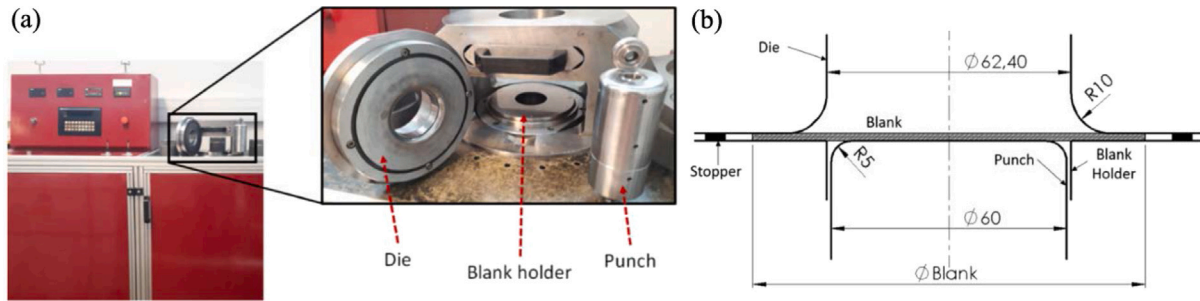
Experimental set-up for cup drawing tests [1]: (a) Schematics of the hydraulic universal testing machine and tooling parts (composed of four parts: a die, a blank holder, a cylindrical punch and a stopper) for cylindrical cup drawing experiments. (b) The geometry of the tooling system (dimension in mm) for cylindrical cup drawing experiments. The initial diameter of the blank is 107.50 mm and the blank holder force was set as 40 kN.
